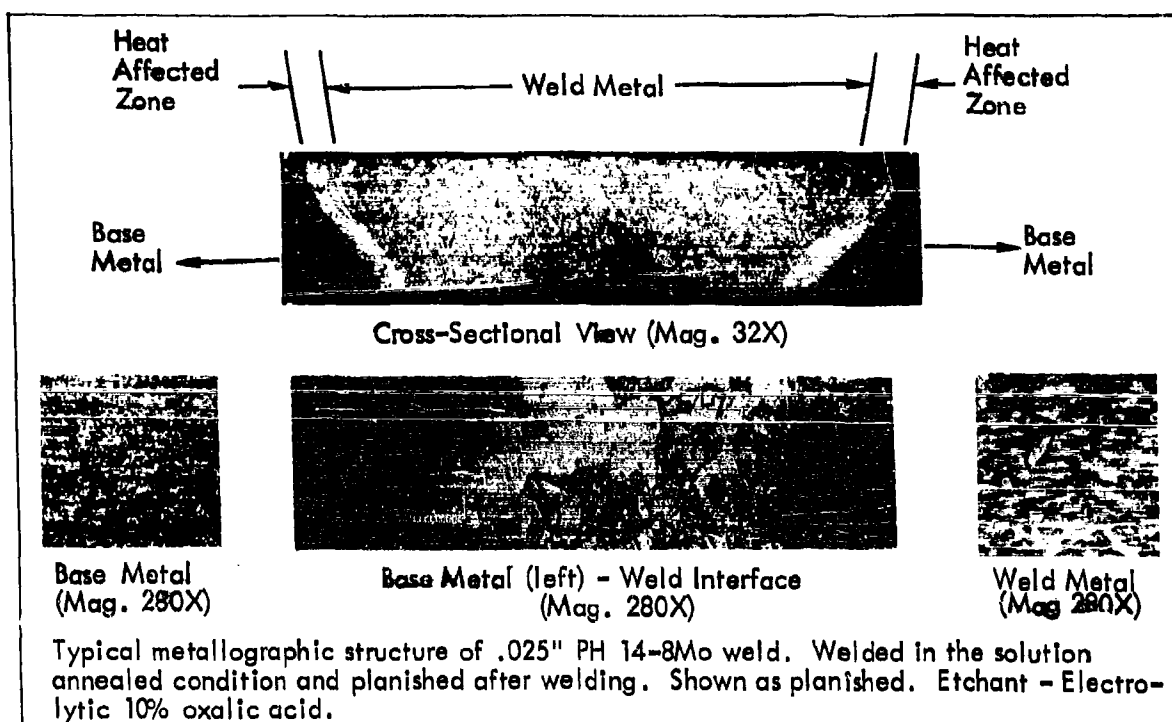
Typical Metallographic Structure of Fusion-Welded PH 14-8Mo as Welded
